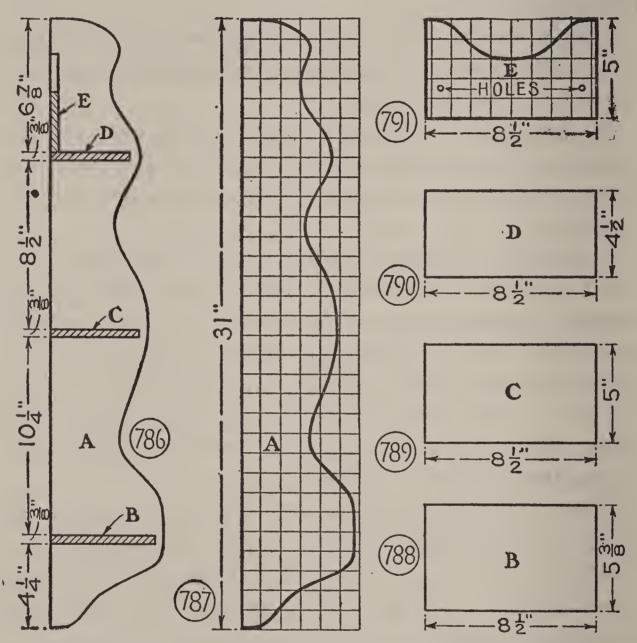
Cross-Section of Wall-Rack Shown in Fig. 777.
